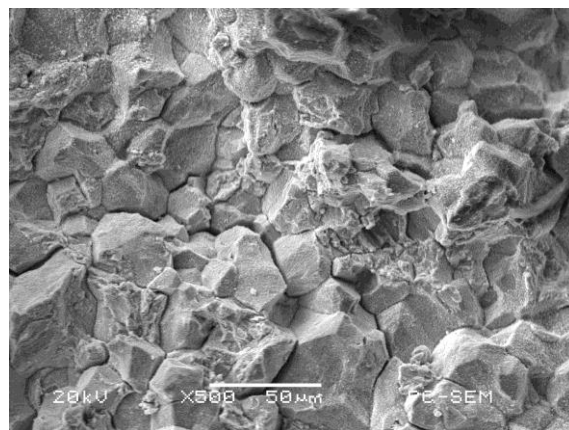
Schematic diagram showing the typical IG fracture morphology.
